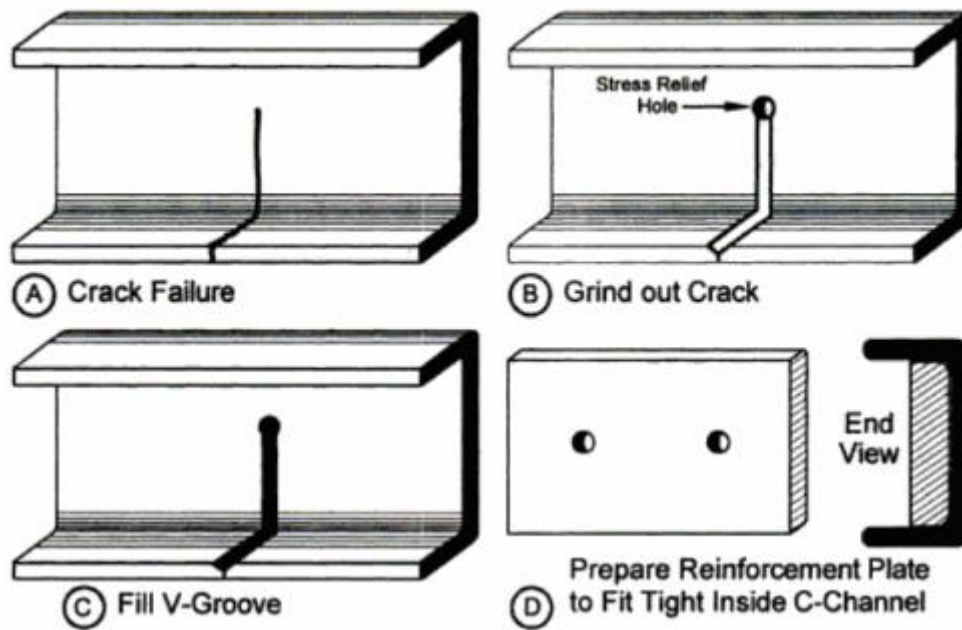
Repair process of a crack with a perpendicular changing direction [13]
